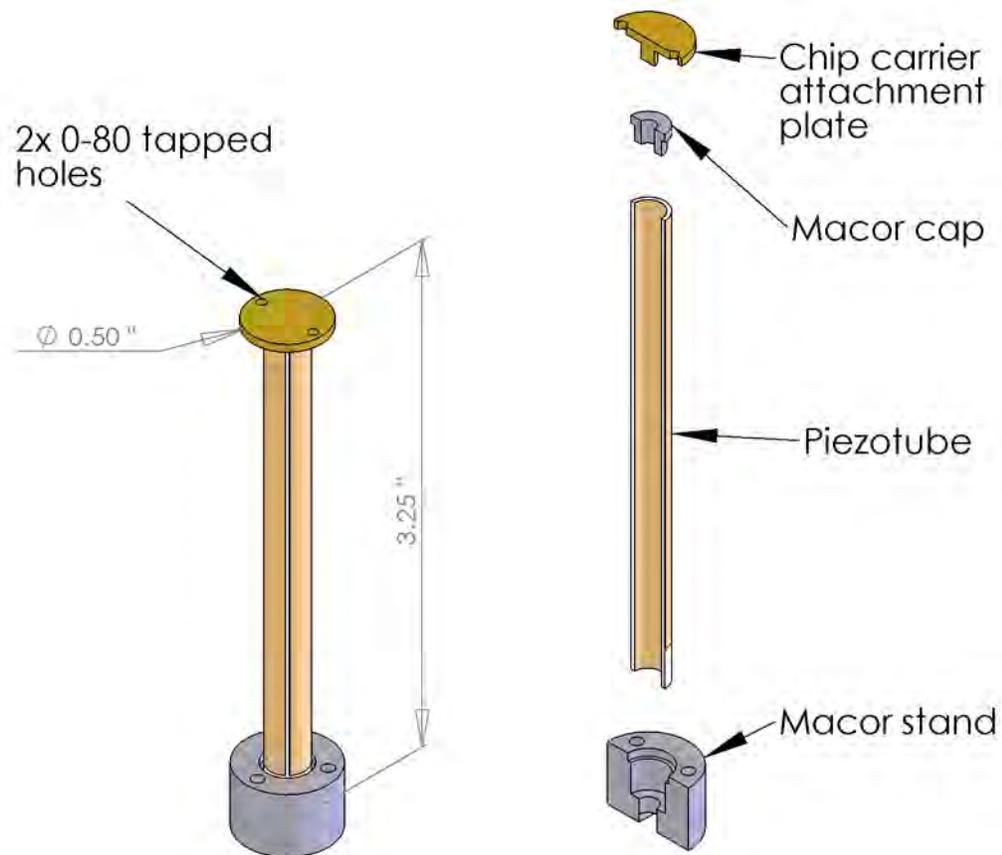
(left) Isometric projection of the piezotube assembly. Two 0-80 tapped holes in the brass chip carrier attachment plate allow for mounting of the chip carrier to the piezotube assembly. (right) Exploded section of the piezotube assembly. The four pieces are epoxied together prior to attachment to the microscope. Note that the two pieces that directly contact the piezotube are both Macor, an insulating glass ceramic produced by Corning Incorporated, of Corning, NY, to ensure electrical isolation of the piezotube from the rest of the microscope.
